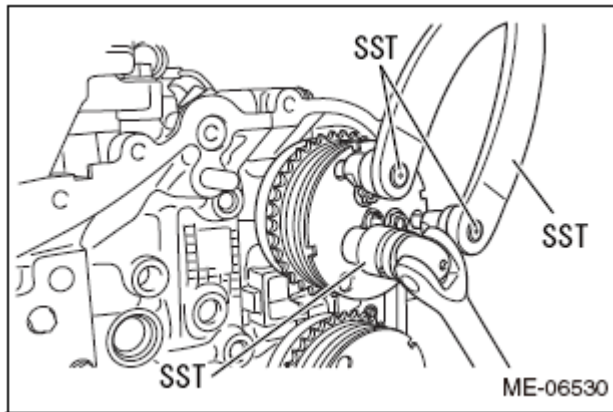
Removing Camshaft Timing Intake Gear Assembly LH
